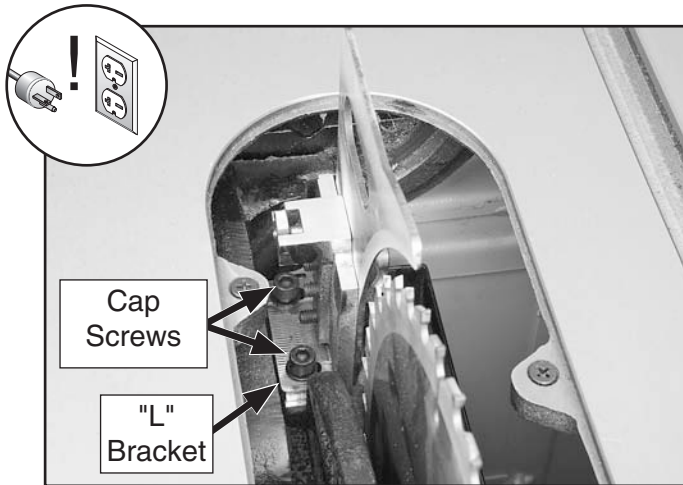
Cap screws for adjusting spreader/ riving knife position.
